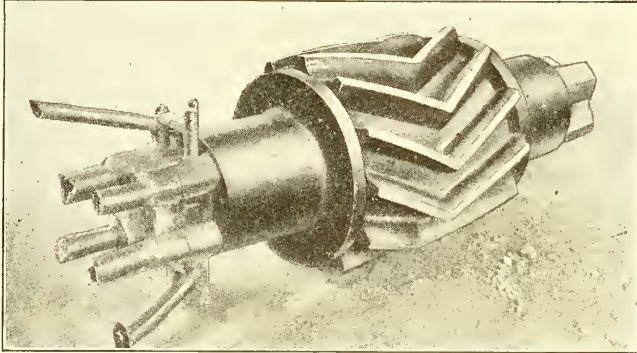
Worn Pods Built Up with Thermit Steel. The Repair Consisted of Four Welds Made Simultaneously, using Two Pouring Gates and Two Crucibles.
